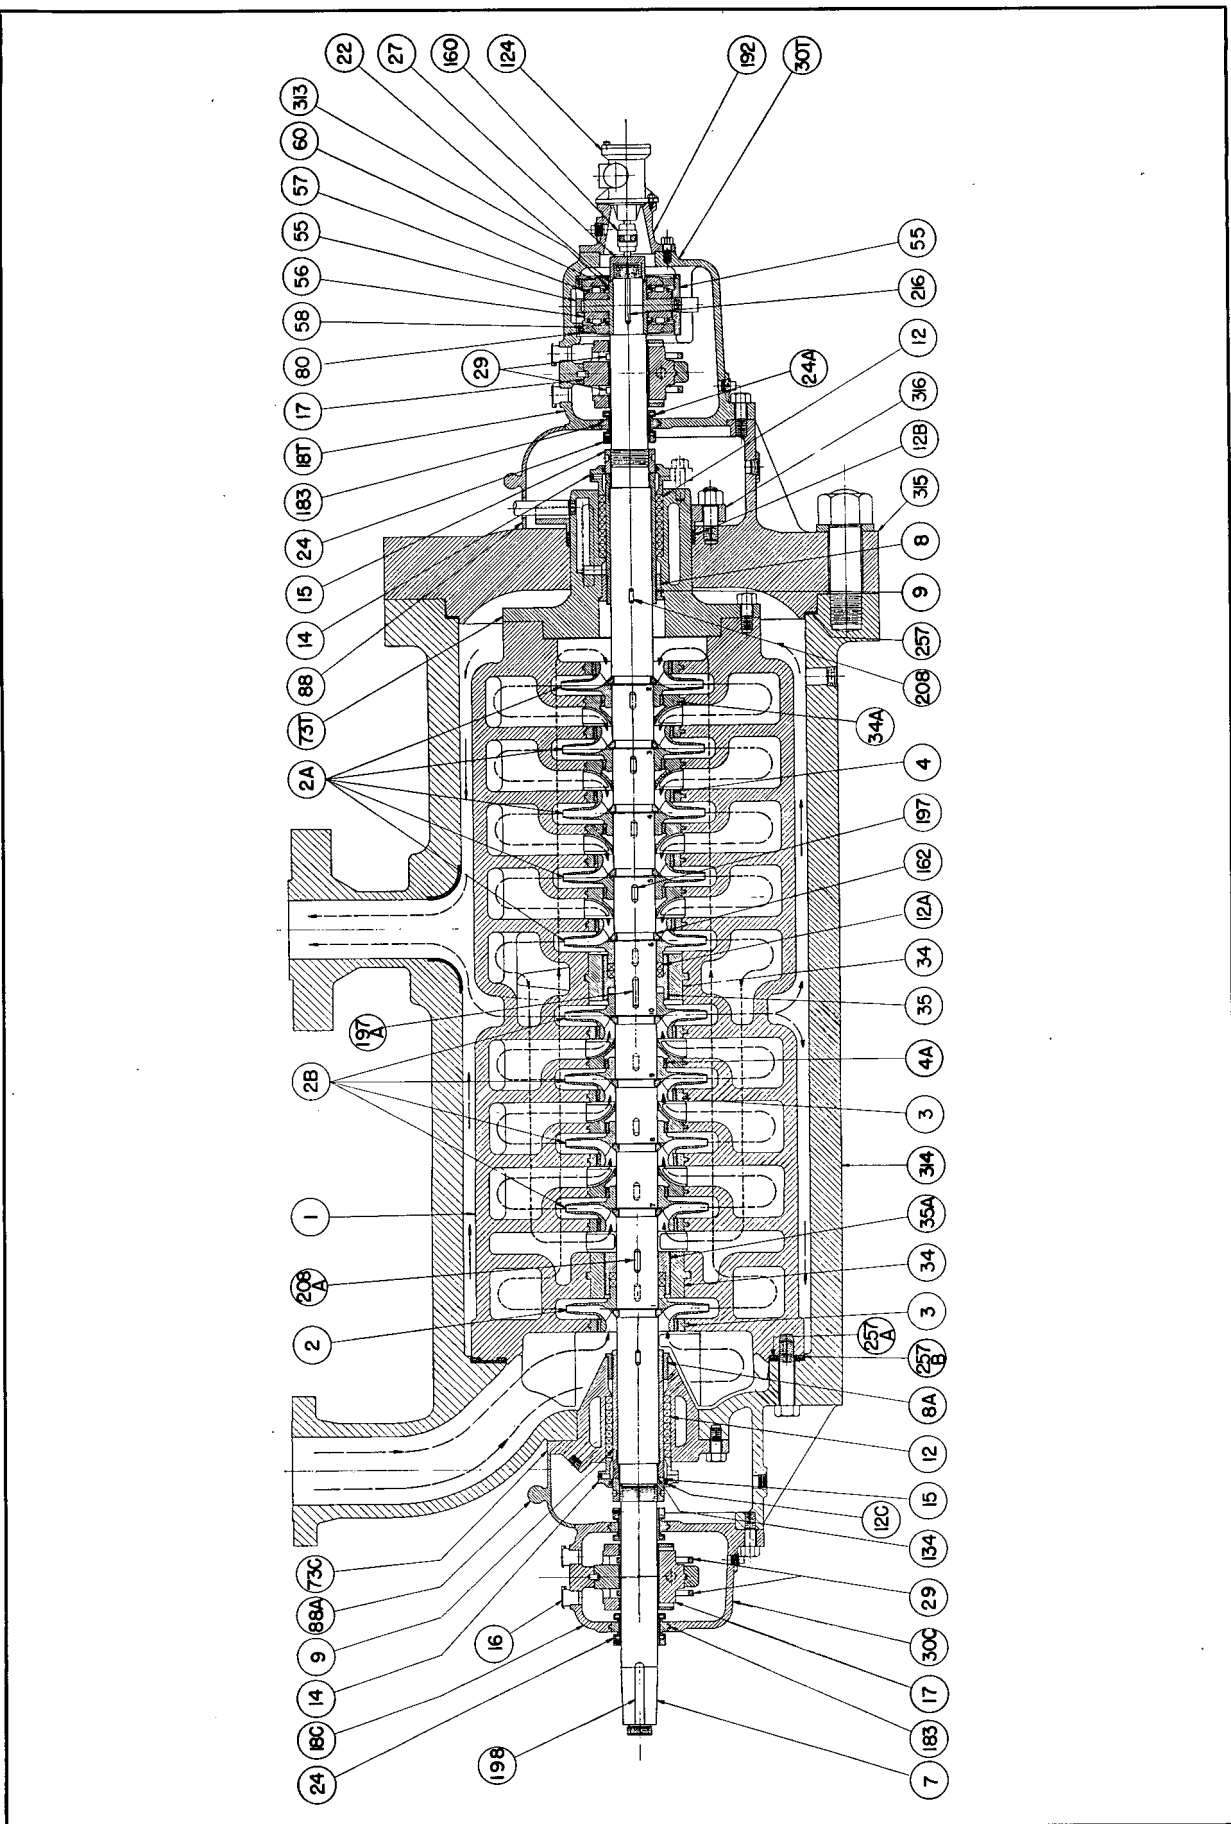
Barrel type pump without lubricated sleeve and Kingsbury type thrust bearings.
